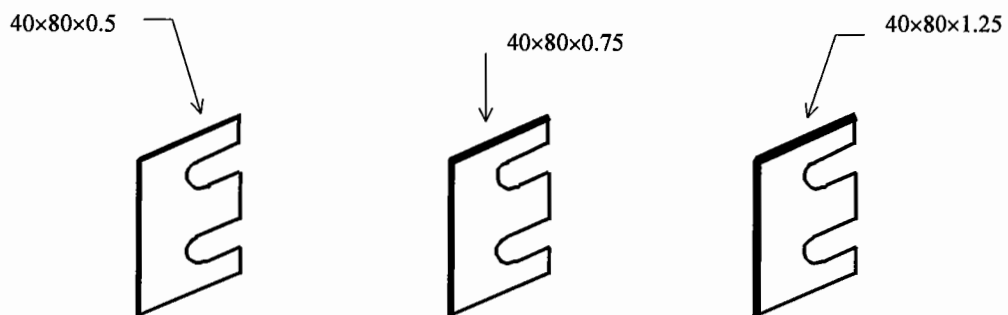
Shape and size of steel plates (to be inserted into the frame joints) used to control different crack widths.
